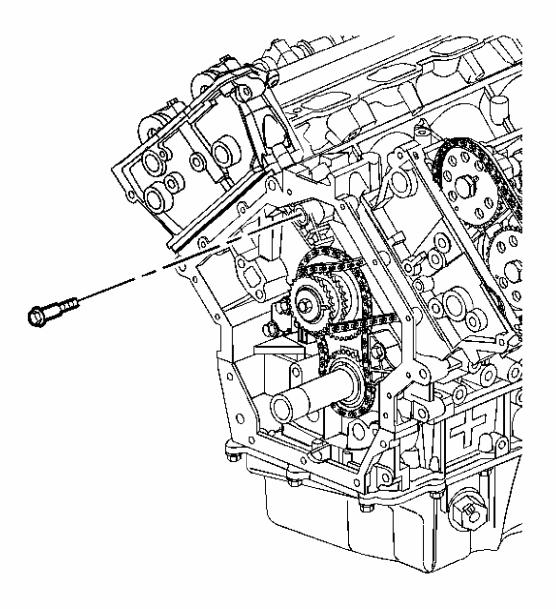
Identifying Lower Right Secondary Camshaft Drive Chain Guide Bolt Courtesy of GENERAL MOTORS CORP.
